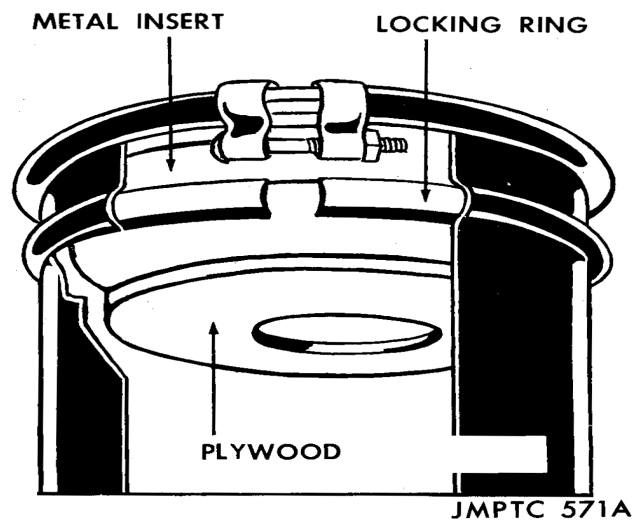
Cup-type insert locked in place (MIL-D-6054).
